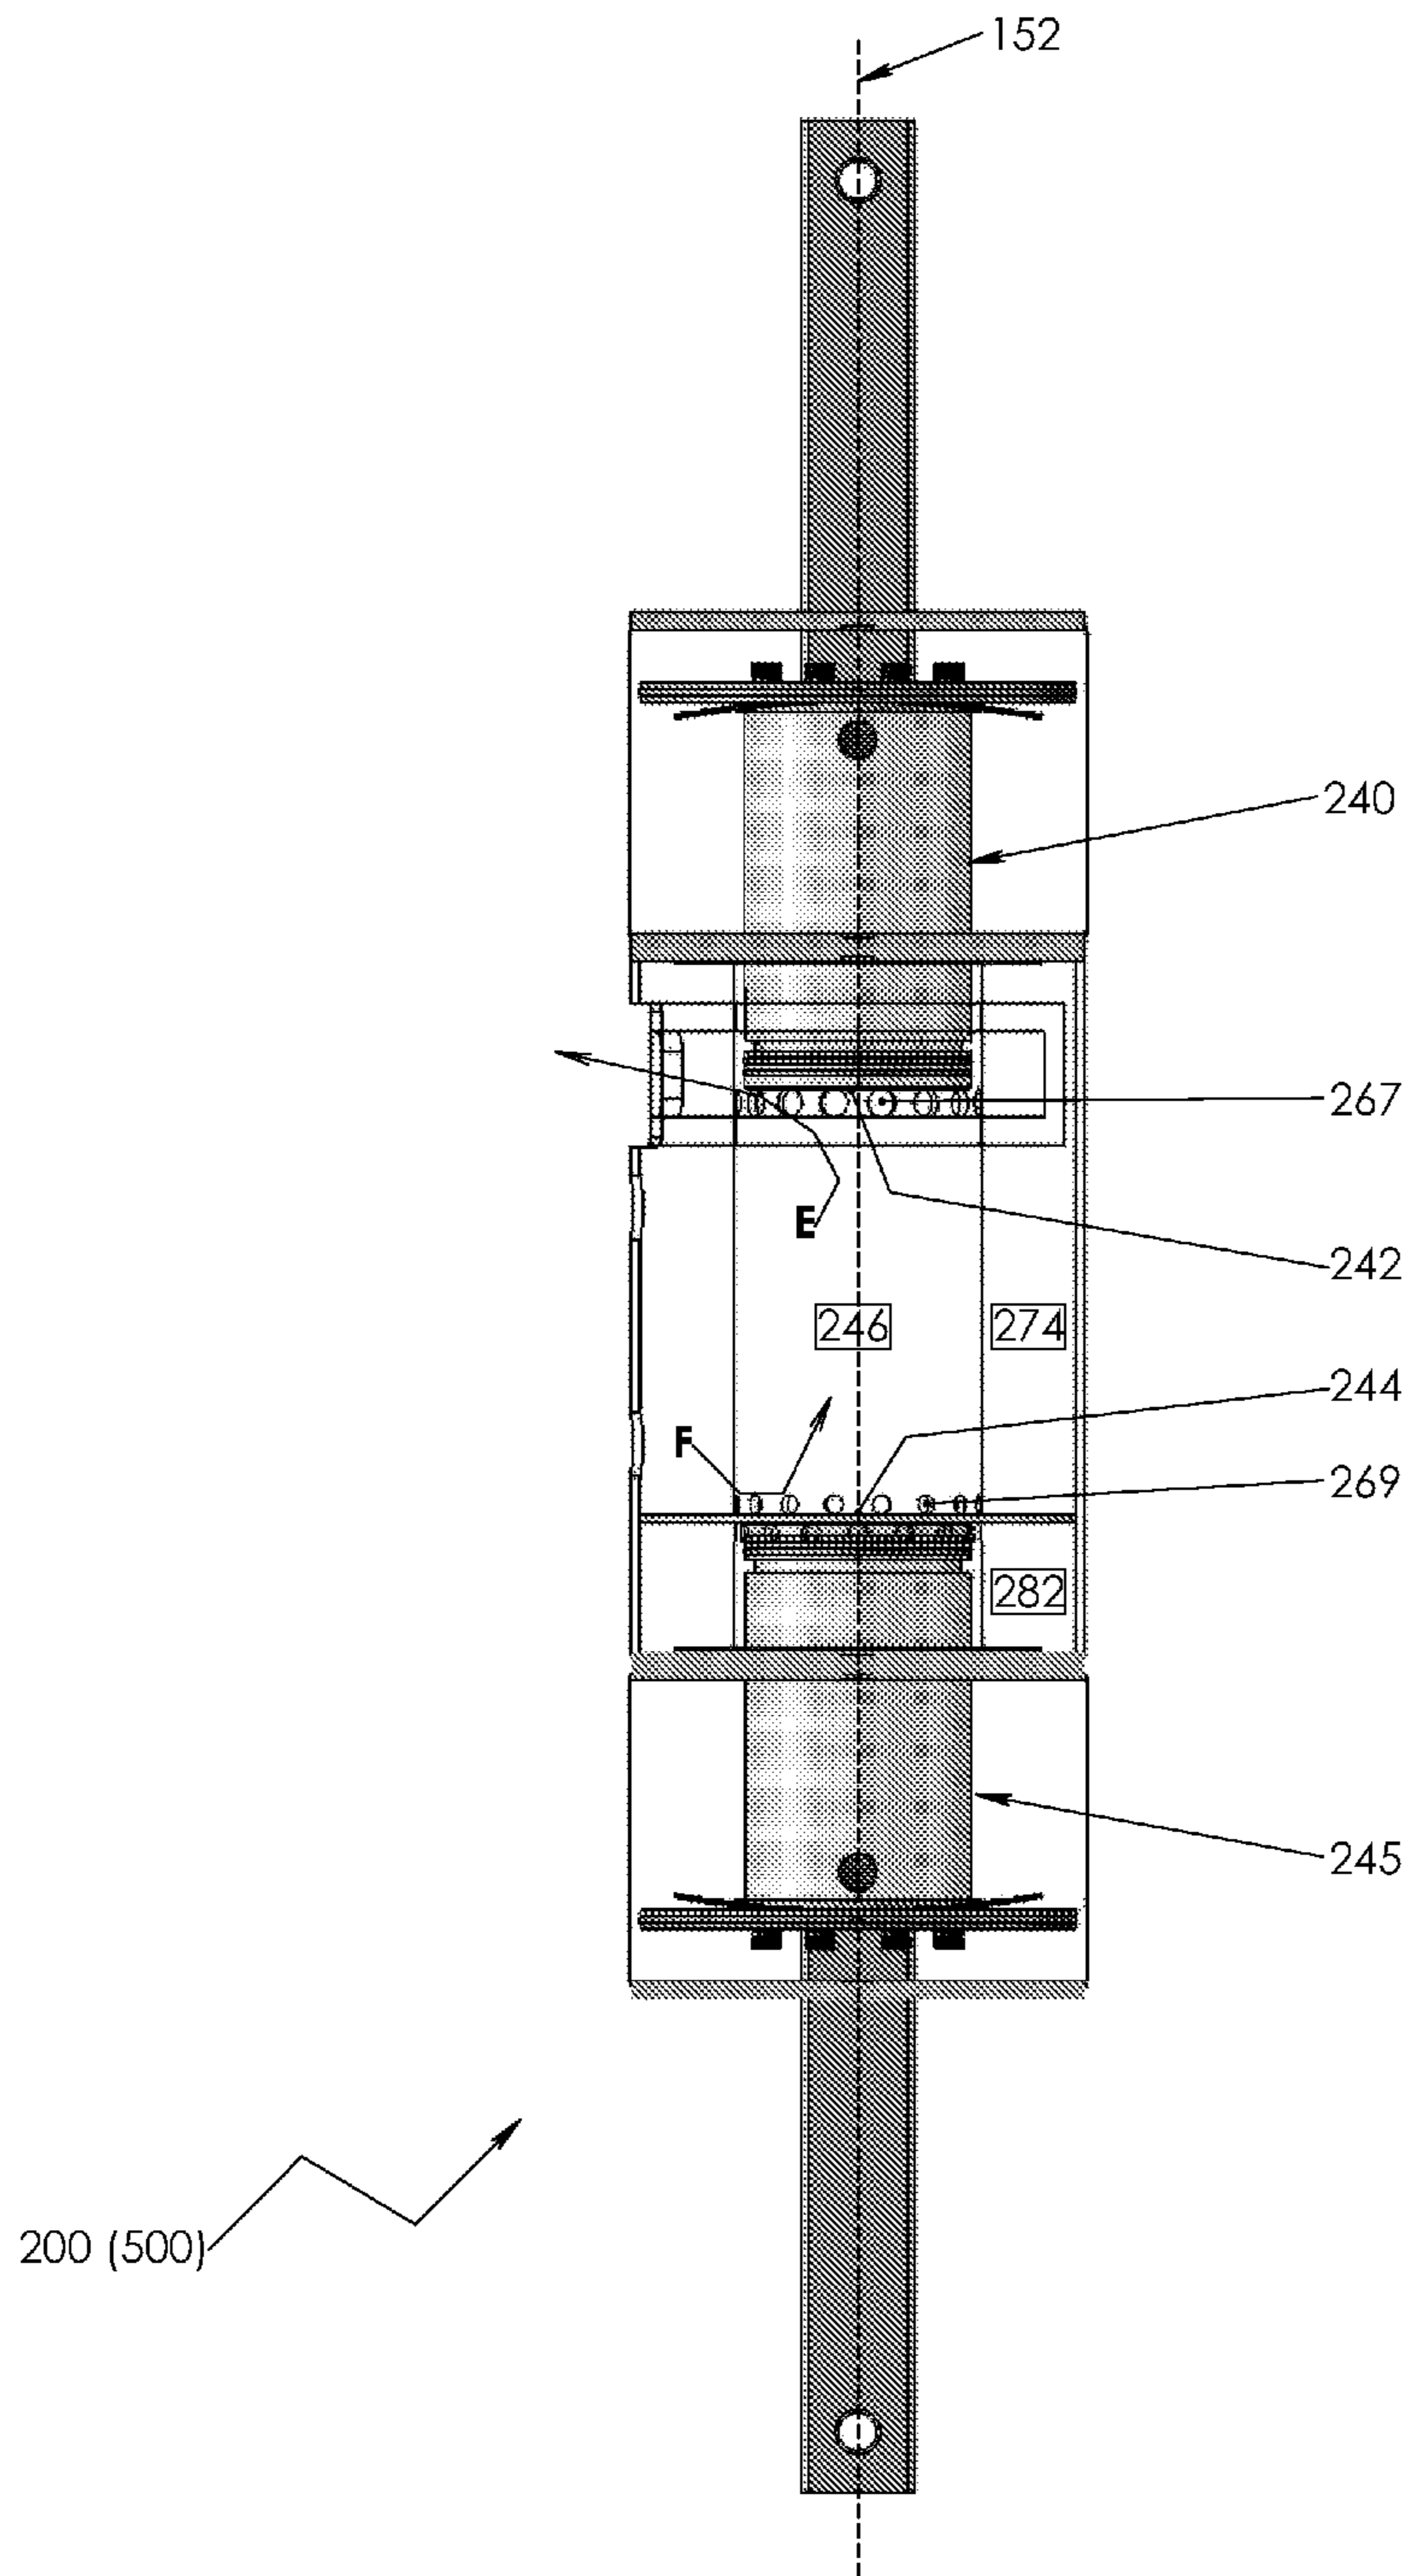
D. SIDE, CROSS-SECTIONAL VIEW OF COMBUSTION ASSEMBLY DURING ENGINE CYCLE
